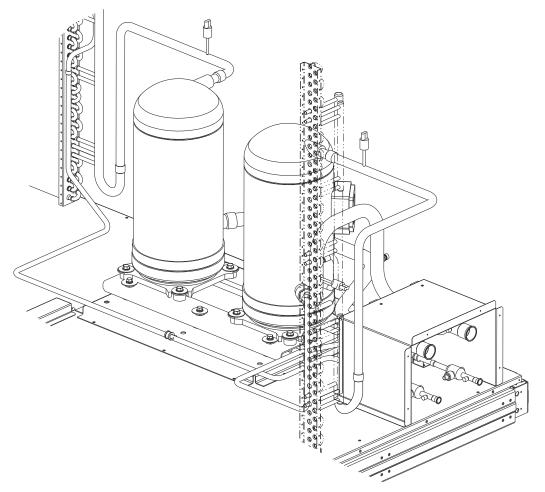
569L*25-28(T,U)~Compressor~Assembly~(Rear~View)
